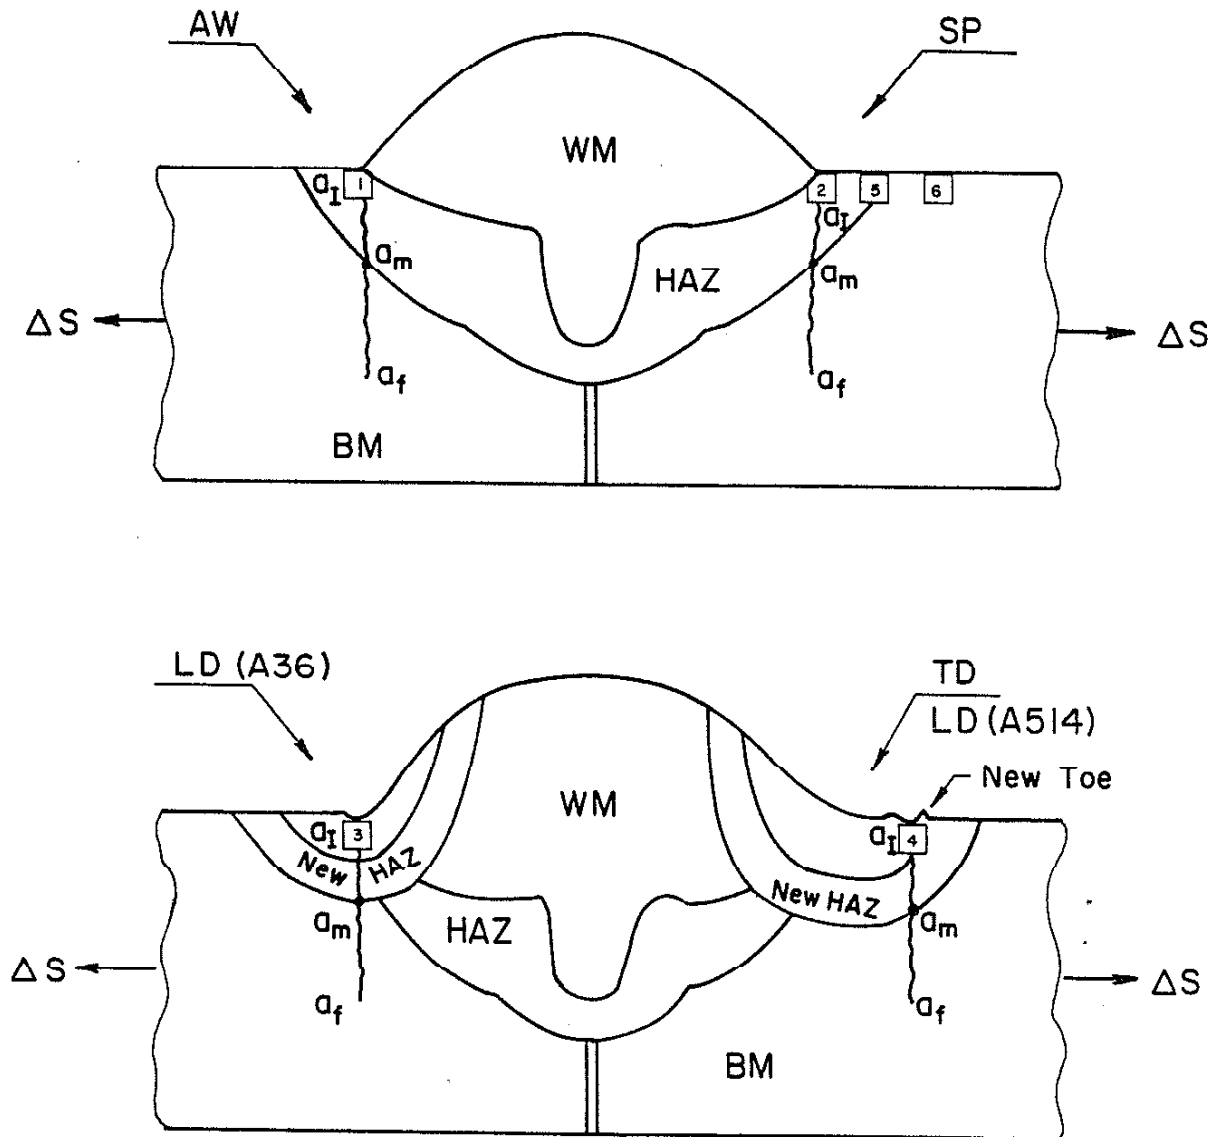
Schematic Diagram of Cross-Sections of As-Welded and Post-Treated Weldments for Both A36 and A514 Steels. (AW = As-Welded; SP = Shot-Peened; LD = Laser-Dressed; TD = TIG-Dressed) Fatigue Crack Paths are Indicated.
